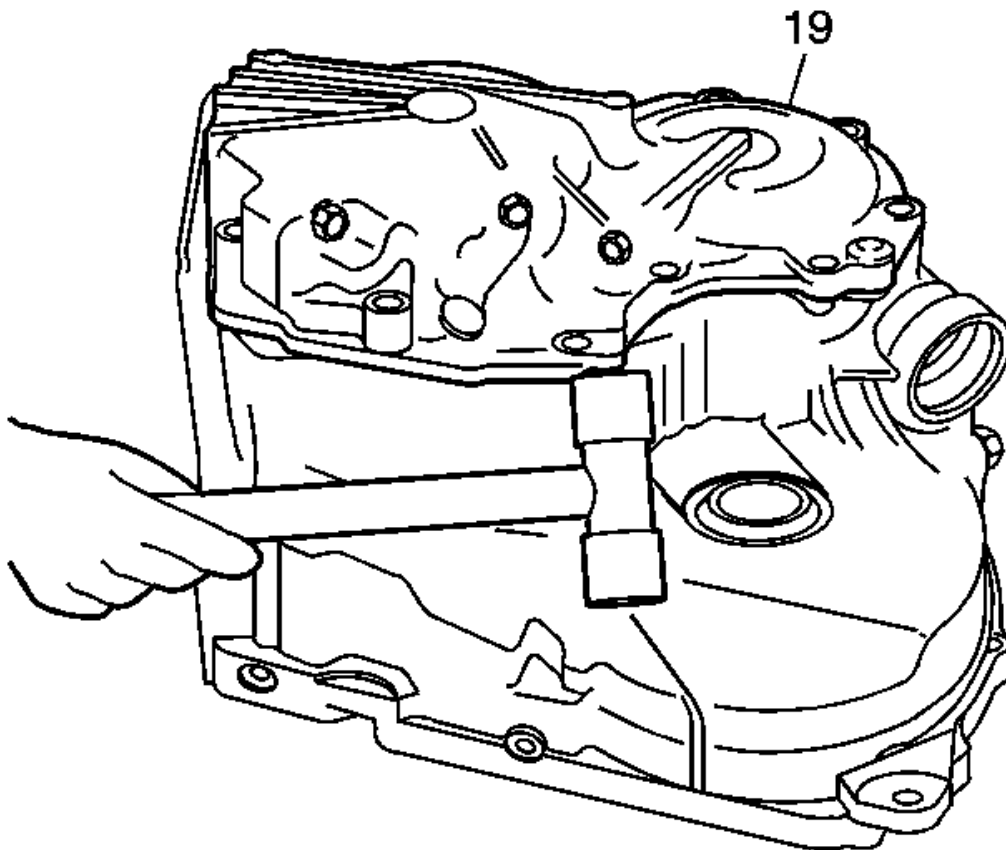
Control Valve Channel Plate - Upper Plate Side
